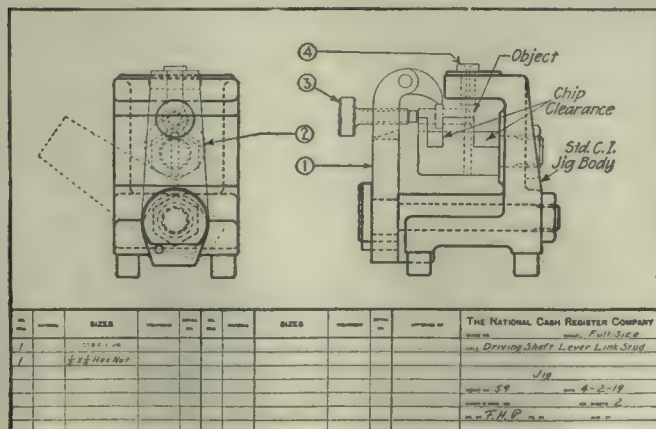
JIG ASSEMBLY USING FIG. 1 AS A BASE
